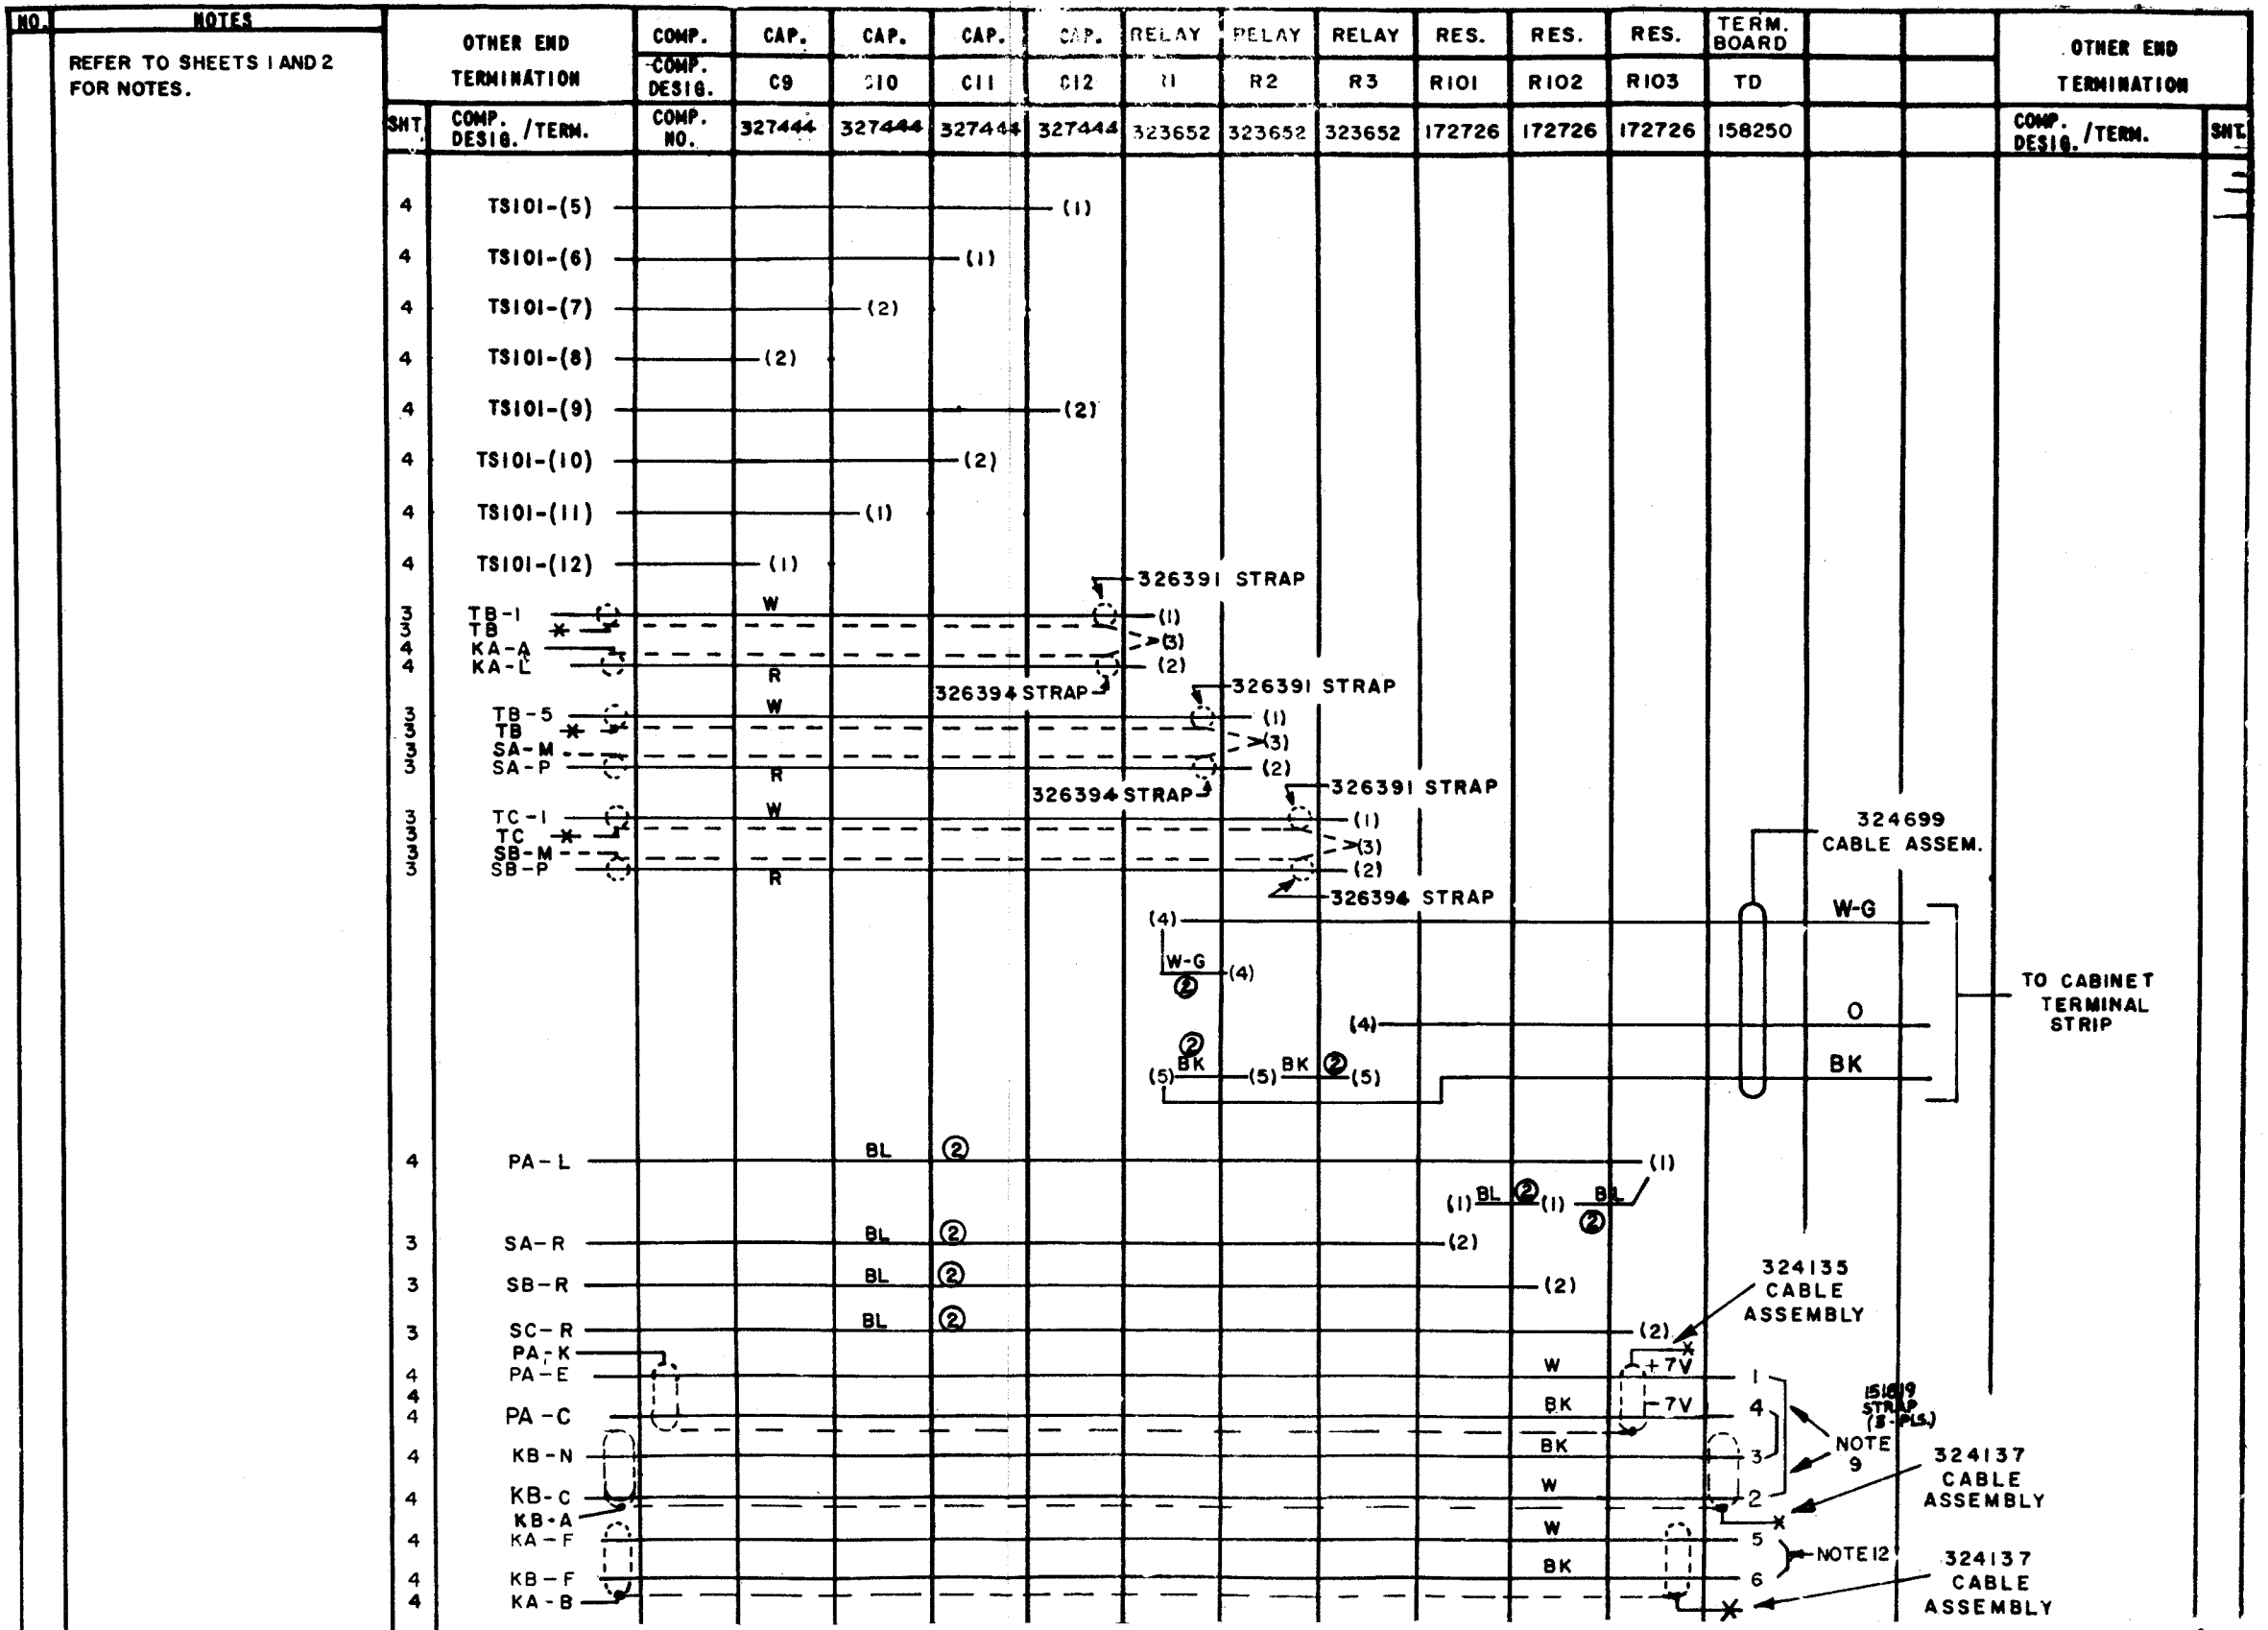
323815 Electrical Service Assembly (Signal) Wiring Diagram (Sheet 5 of 5)
